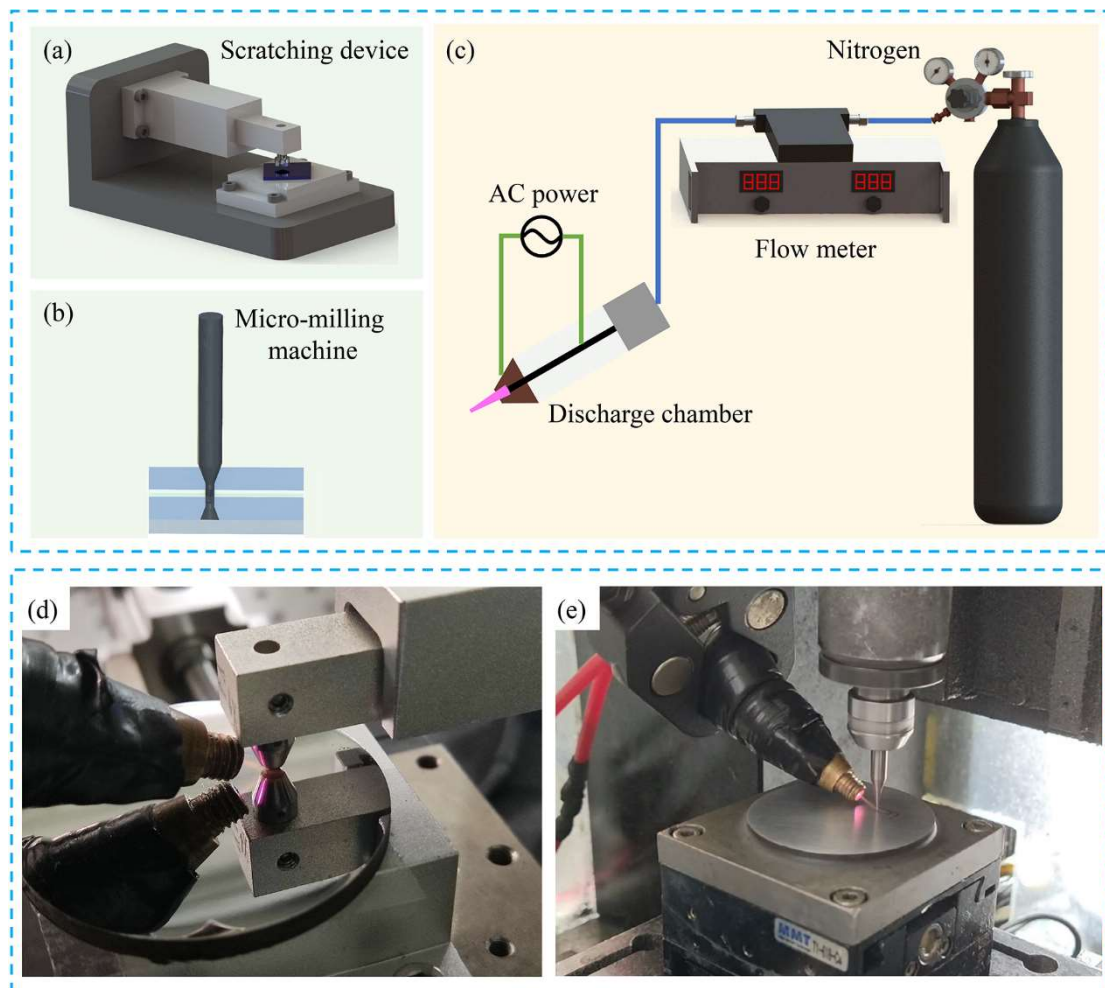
Schematic and physical drawings of the experimental devices: (a–c) schematic diagrams, (a) single-grain diamond scratching device, (b) micro-milling machine, (c) CPJ generating device; (d,e) physical drawings, (d) CPJ-assisted scratching device, (e) CPJ-assisted micro-milling device.
